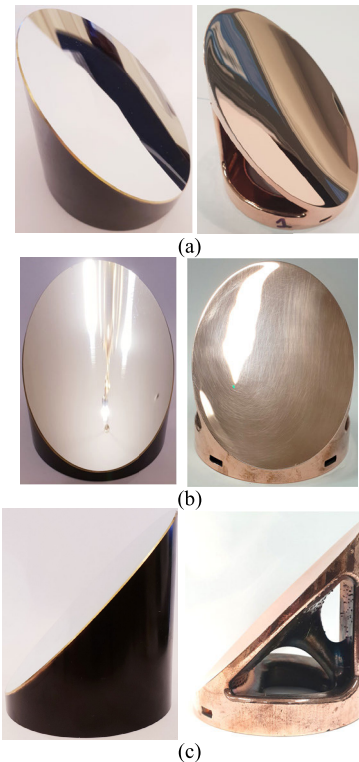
Photographs of commercial counterpart (left) and mass-reduced 3-D printed modified replica (right) 90° off-axis parabolic mirrors: (a) isometric views; (b) front views; and (c) side views.
